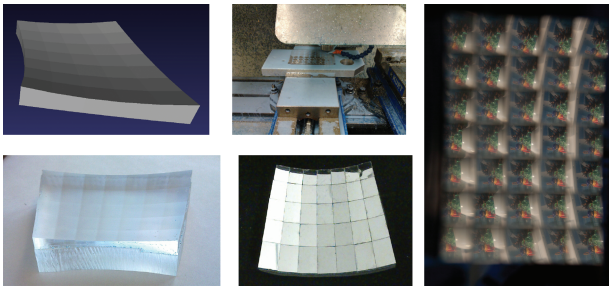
Design and fabrication pipeline. After computing an optimal shape, we use CNC machining to form a piece of acrylic into a support structure for a set of precision-cut polished stainless steel segments. This mirror may be used for single-shot capture of a light field with 35 views.
